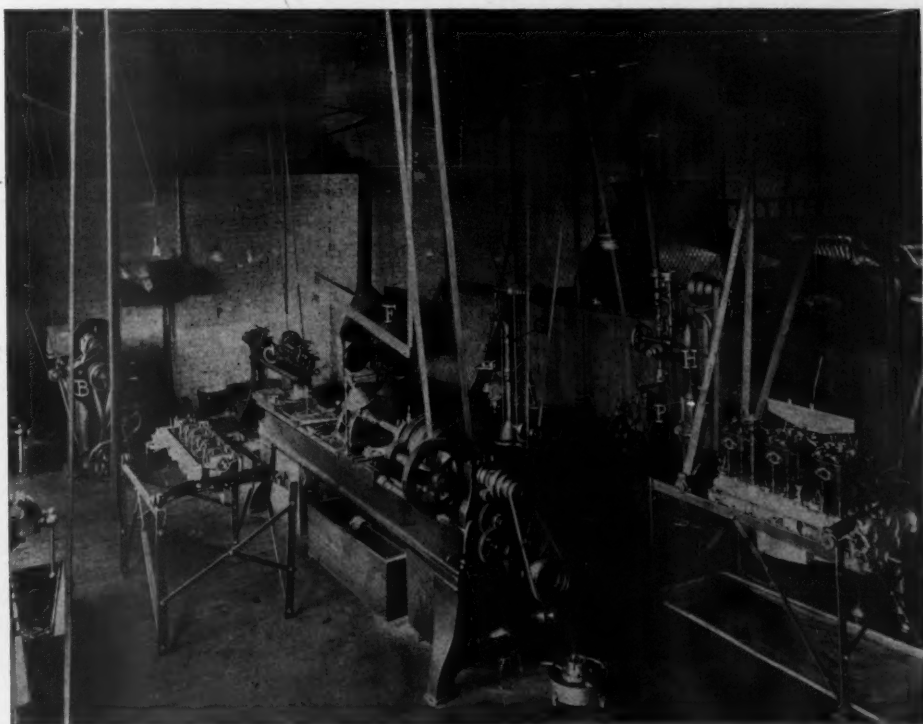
A VIEW OF H. PAULMAN & CO.'S REPAIRSHOP, CHICAGO, SHOWING MANY INTERESTING FEATURES OF ITS MACHINE TOOL AND REPAIR EQUIPMENT
